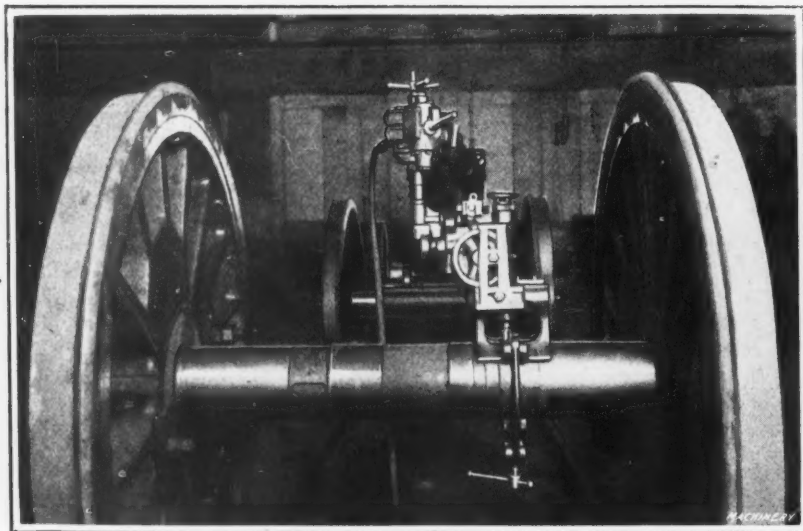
Air-driven Keyseating Machine cutting Keyways for the Operating Eccentrics of the Stephenson Valve Gear
